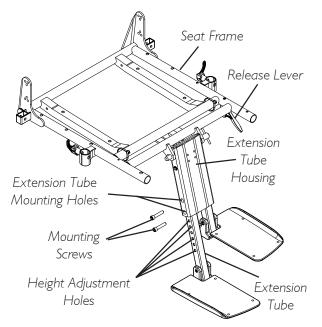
ADJUSTING THE HEIGHT OF THE CENTER MOUNT ADJUSTABLE KNEE ANGLE FOOTREST - FOR ASBA SEATS
